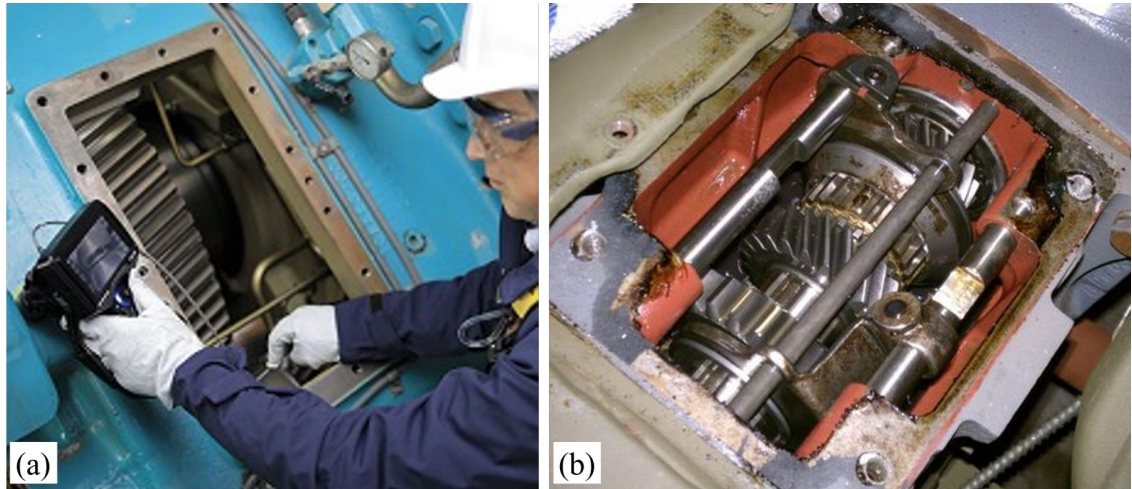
Examples of gearboxes with the inspection cover removed. (a) A wind turbine gearbox [253]. (b) An automotive gearbox [254].
